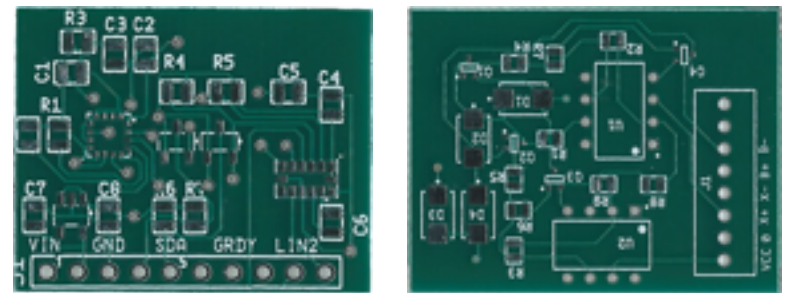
IMU (left) & Magnetorquer (right) PCBs
